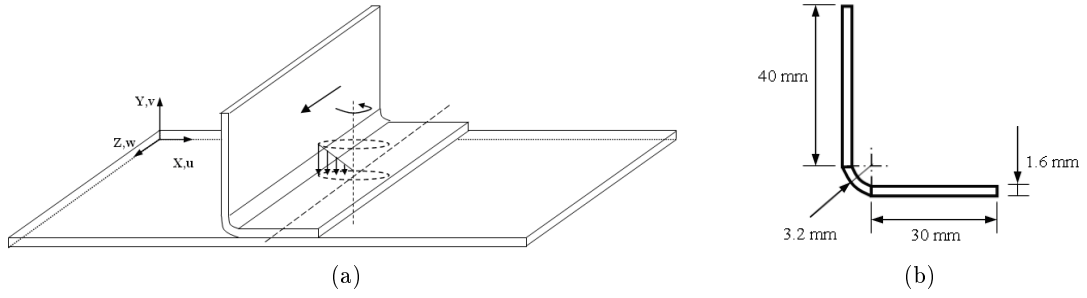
(a) The friction stir welding of an L-shaped stringer on a plate [ref. PAPERs-II-IV] (Tutum et al., 2008a; Hattel et al., 2008). (b) Dimensions of the cross-section of the L-shaped stringer [ref. PAPER-II] (Tutum et al., 2008a).
